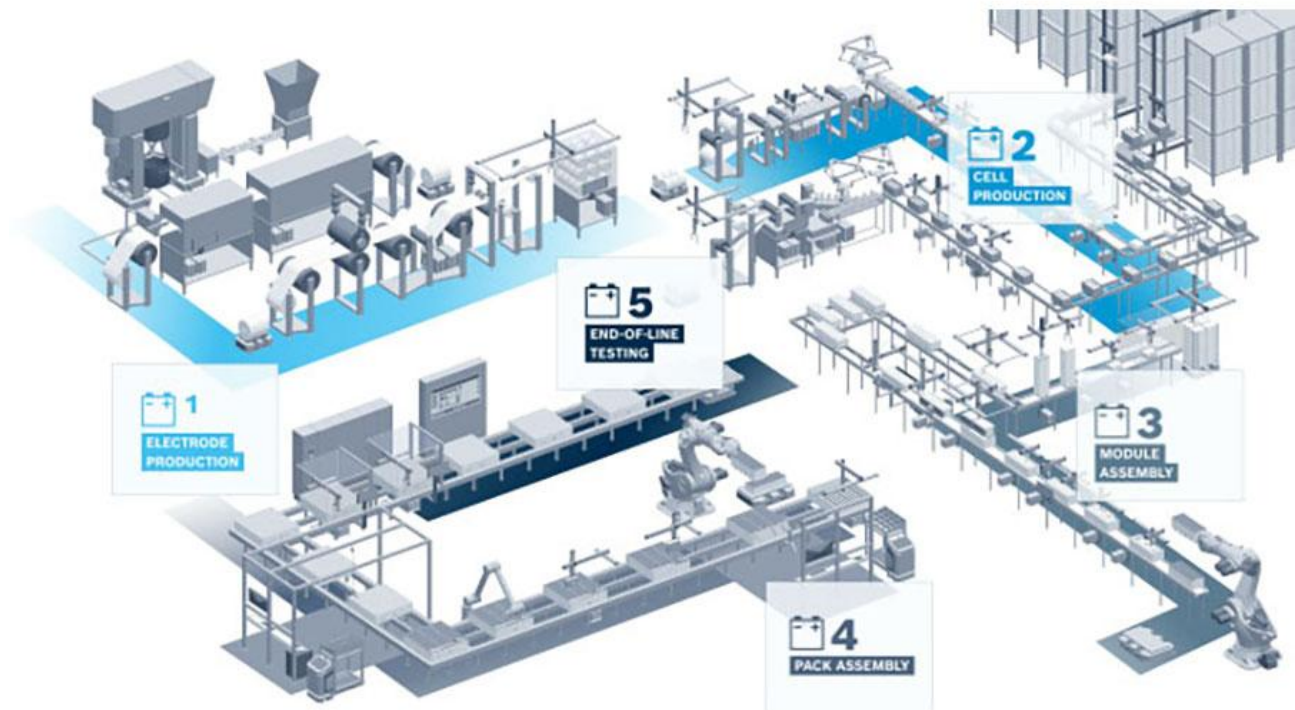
Schematic Battery Manufacturing Plant Layout [3]
